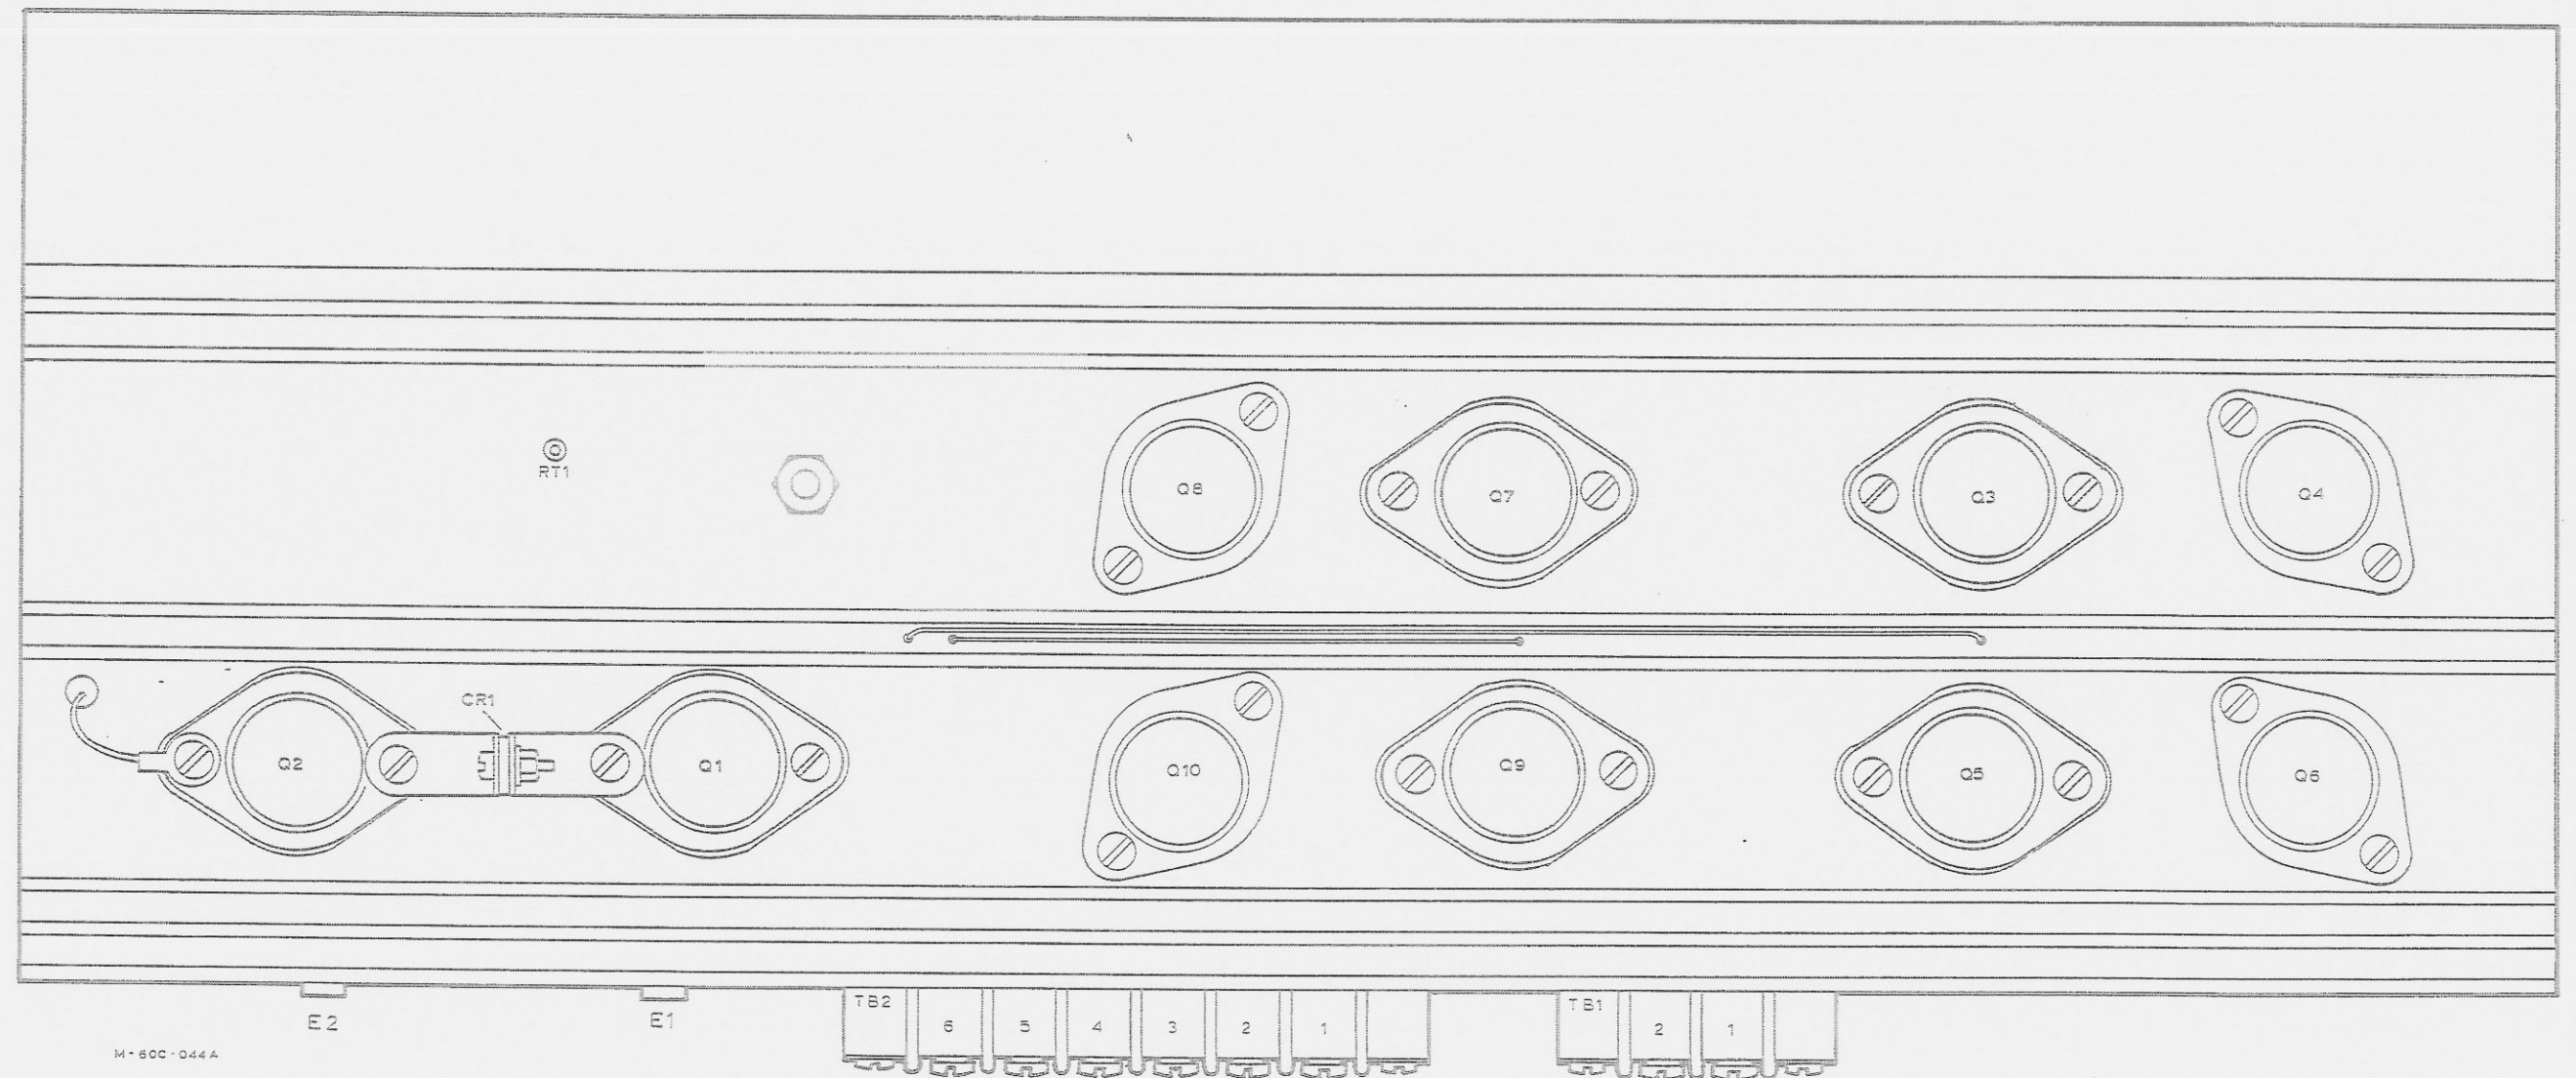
Assembly Detail - NAA13/2 Modulator/Power Amplifier Assembly (Side 1)
